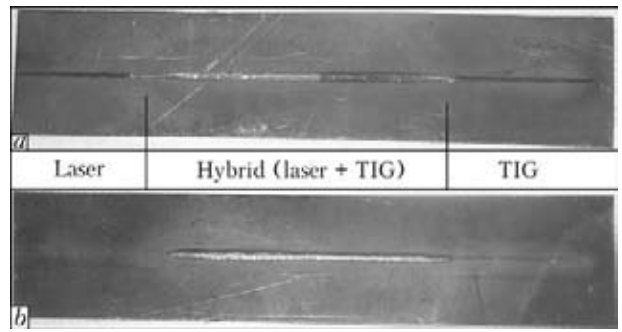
Top (a) and back (b) view of welded samples 1.2 mm thick ($P_L = 250\text{ W}$, $I_a = 20\text{ A}$, $v_w = 100\text{ mm/min}$, TIG torch is before the laser beam)
